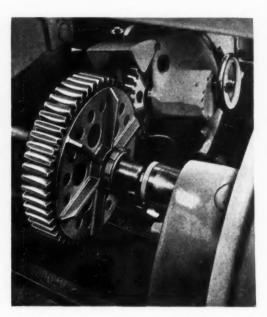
Close-up View of Work and Cutter in Machine Shown in Fig. 1
